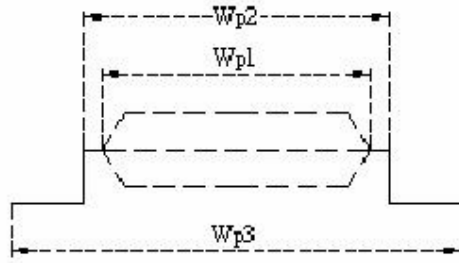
(c) Typical TSSOP 16 pins Package Geometry : Side View
